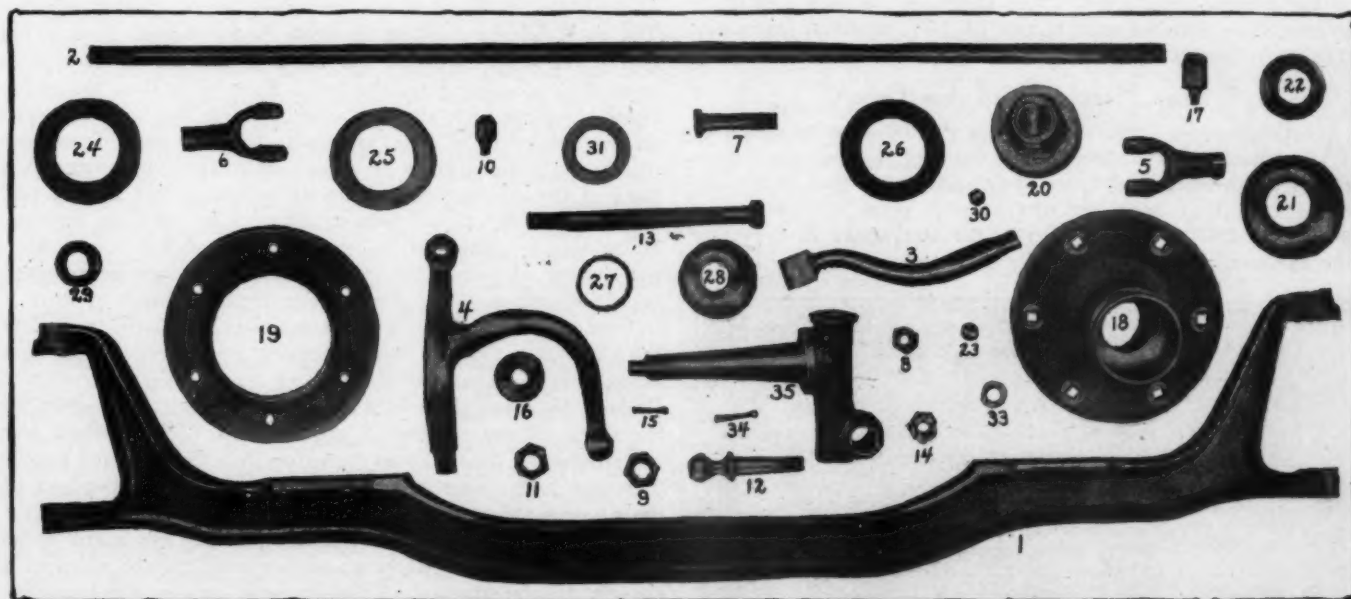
Showing the parts that go to make up a front axle as made by the Sheldon Axle Company
